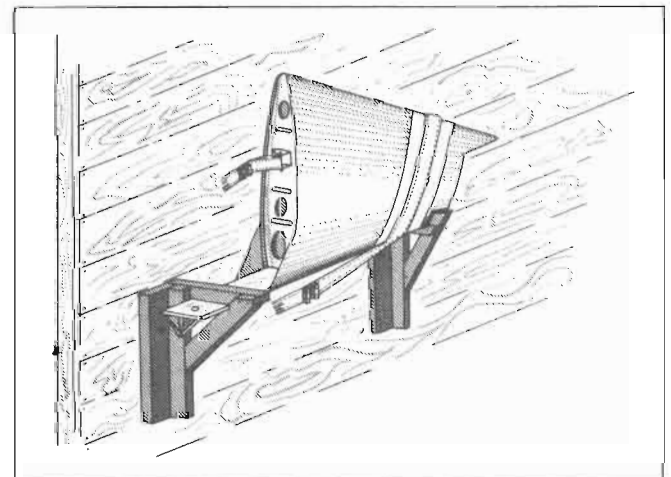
Horizontal Tail Assembly Attached to Platform
